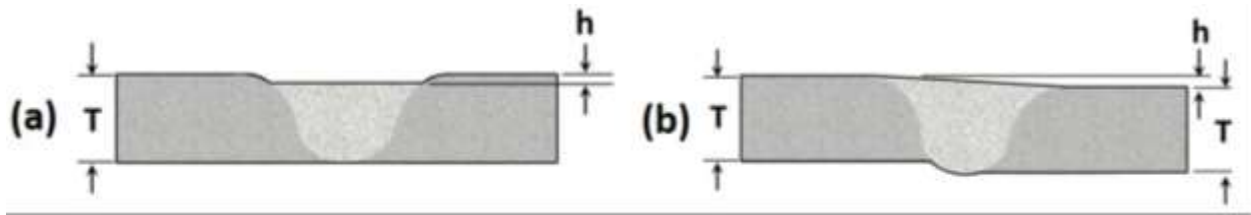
Illustrations of defects: (a) underfill discontinuity of friction stir weld, and (b) mismatch discontinuity [18].
